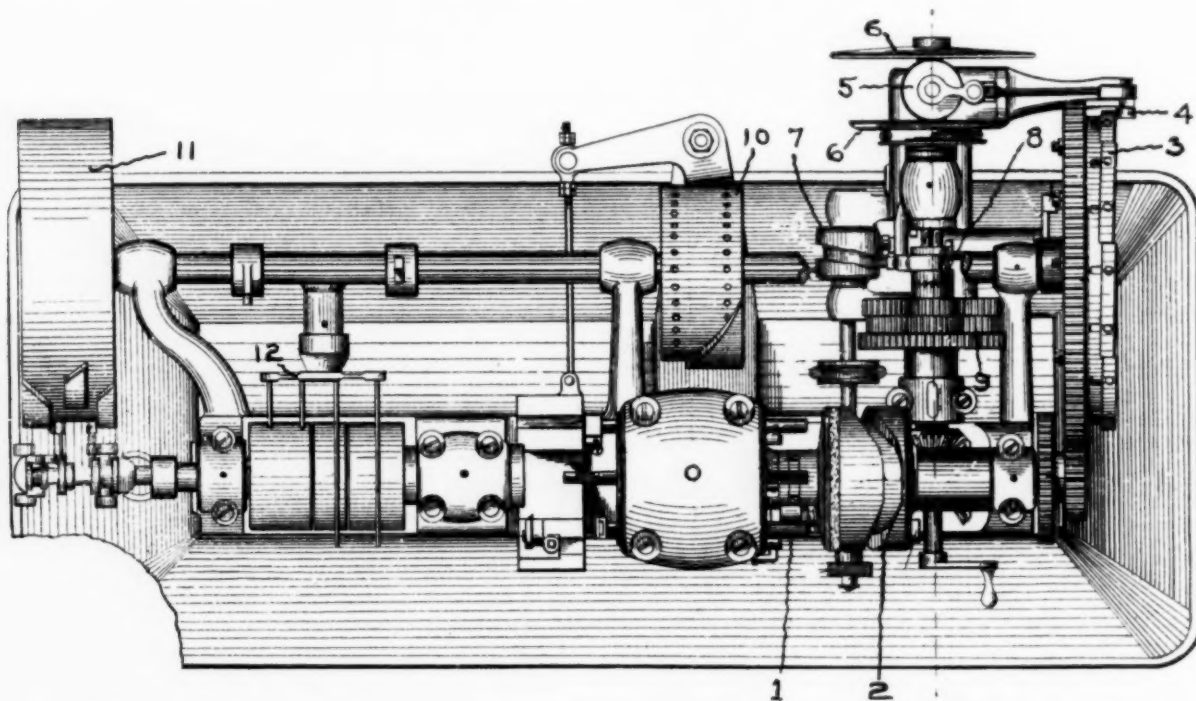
SHOWING CONTROL BY PERMANENT CAMS AND ADJUSTABLE CAMS AND DOGS. CLEVELAND AUTOMATIC MACHINE CO.
